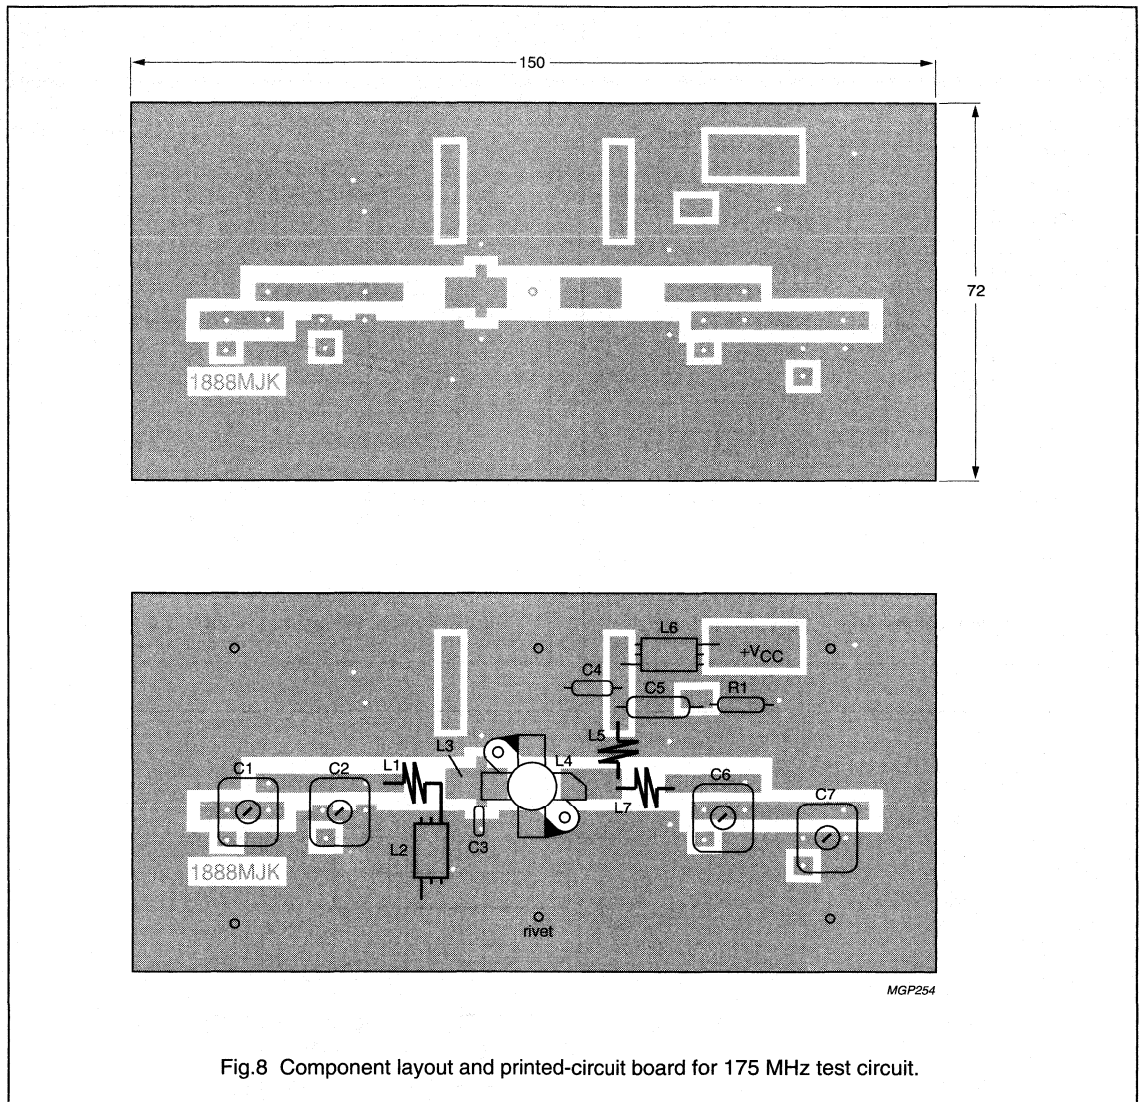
Component layout and printed-circuit board for 175 MHz test circuit.
